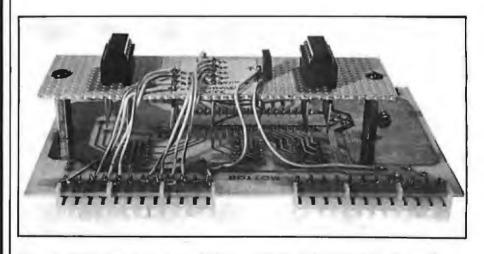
Shown here is the method of mounting the cycle-counter circuit board.
